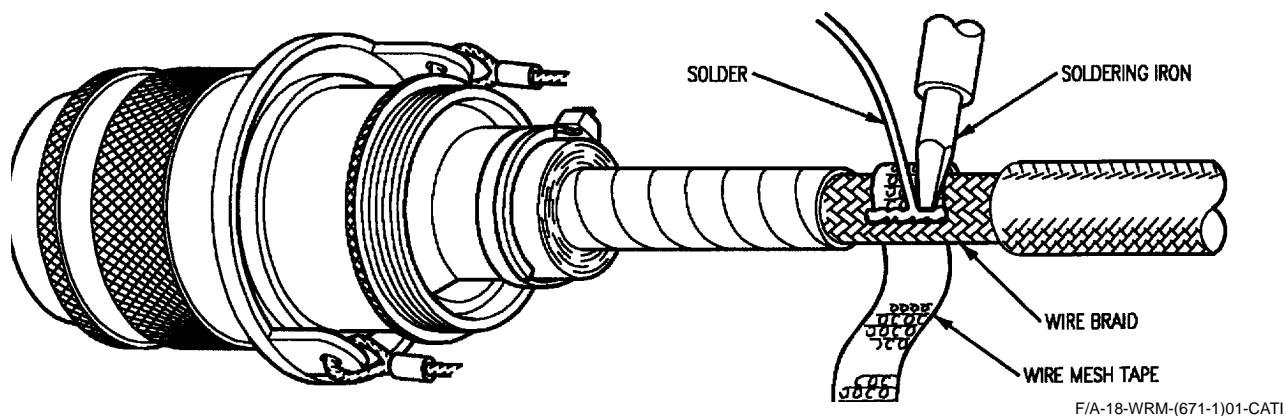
Soldering Wire Mesh Tape to Wire Braid
